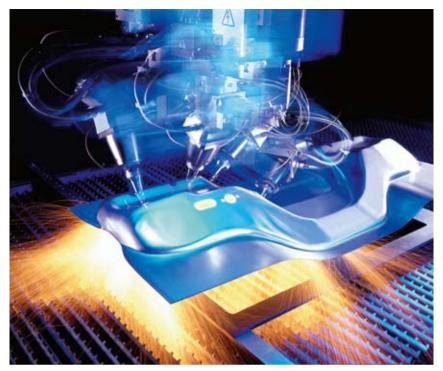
Laser processing system for cutting and welding © TRUMPF GmbH + Co. KG
